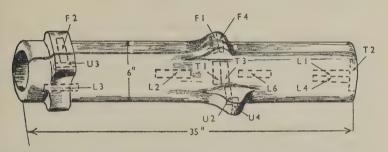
Location of Test-Pieces in Long, Cylindrical Forging.
